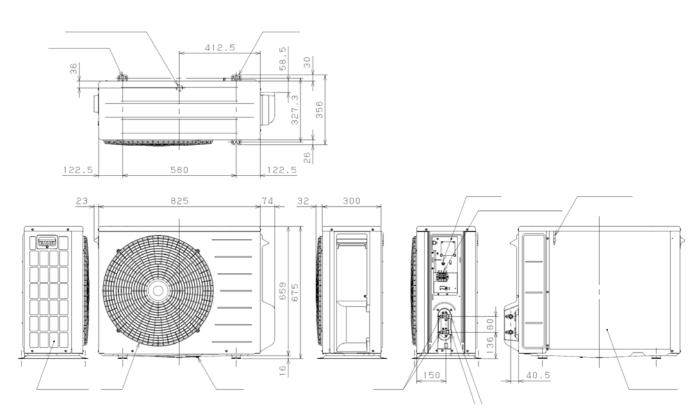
Heat pump unit detail top/front/side view (all dimensions are in mm).
